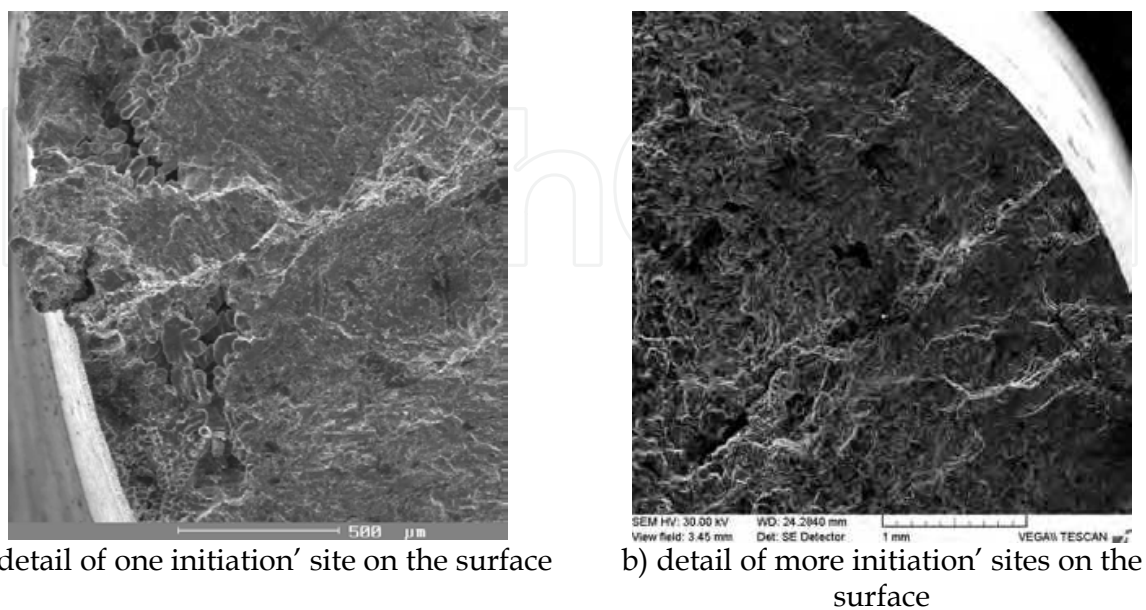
Fatigue crack nucleation - overview of a fracture surface
